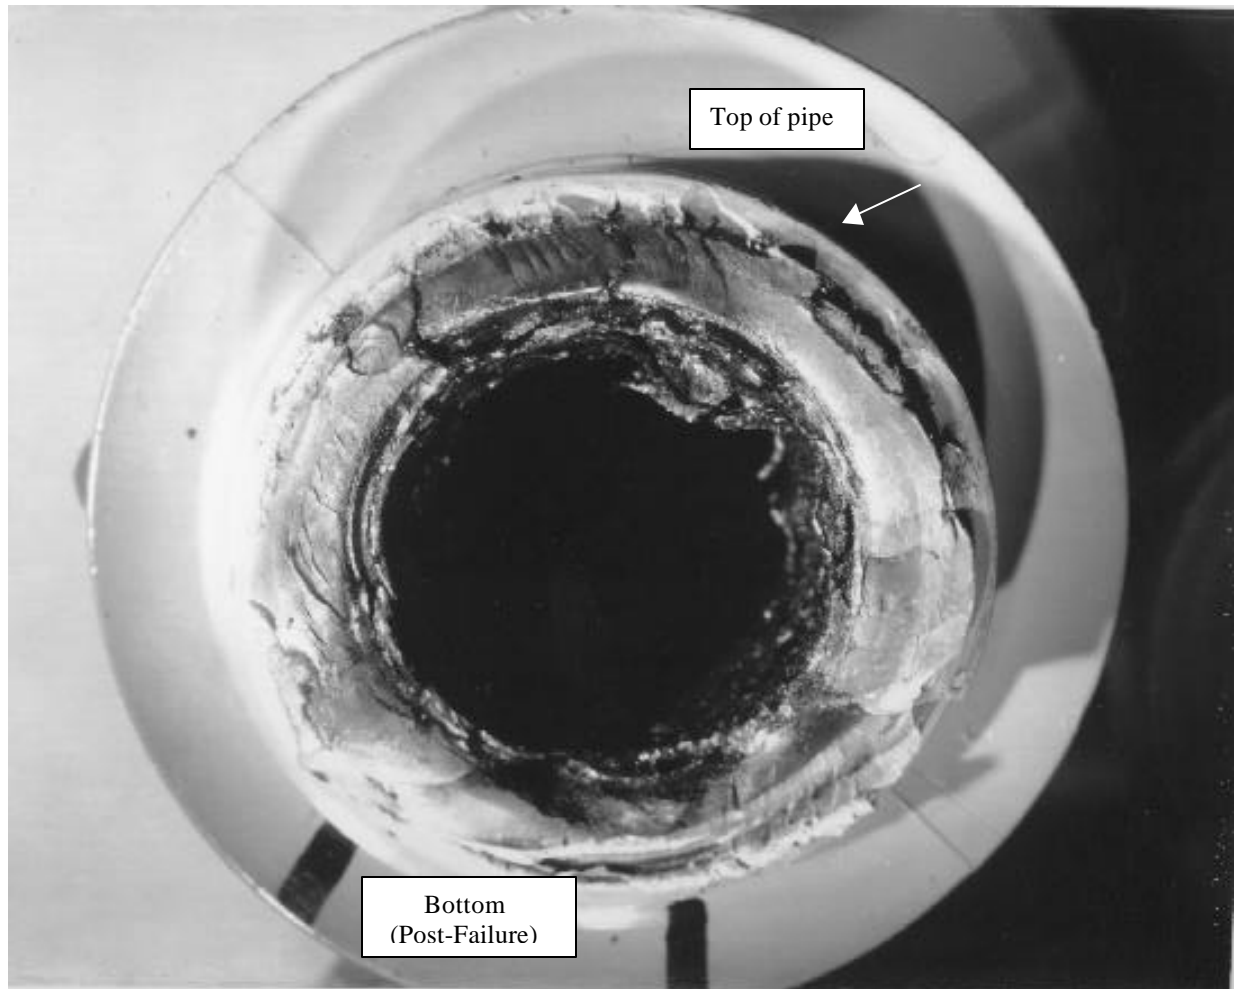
Close-up view of the fitting fracture surface (Neg#54965, ~3X)
